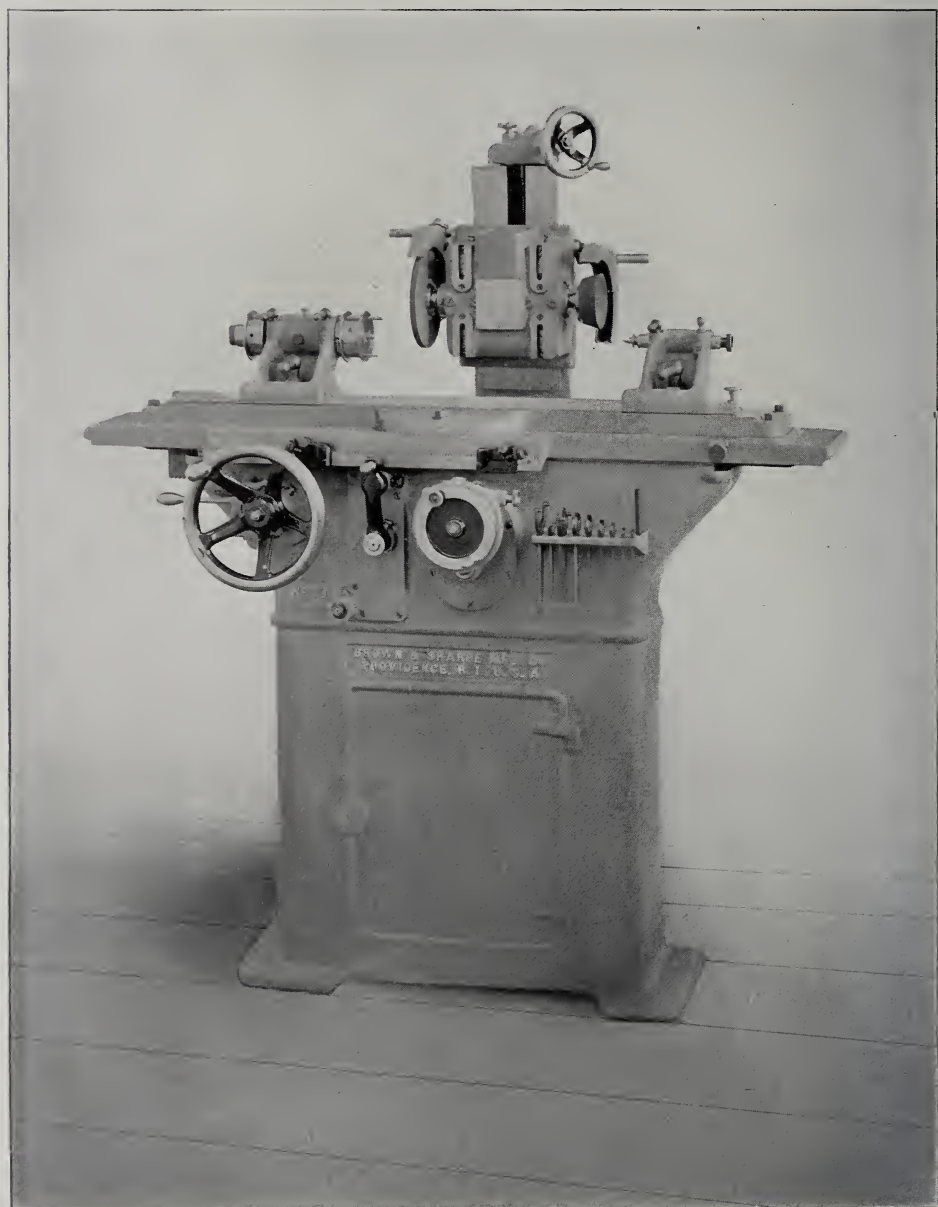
NEW UNIVERSAL AND TOOL-GRINDING MACHINE MADE BY THE BROWN & SHARPE MFG. CO., PROVIDENCE, R. I.
